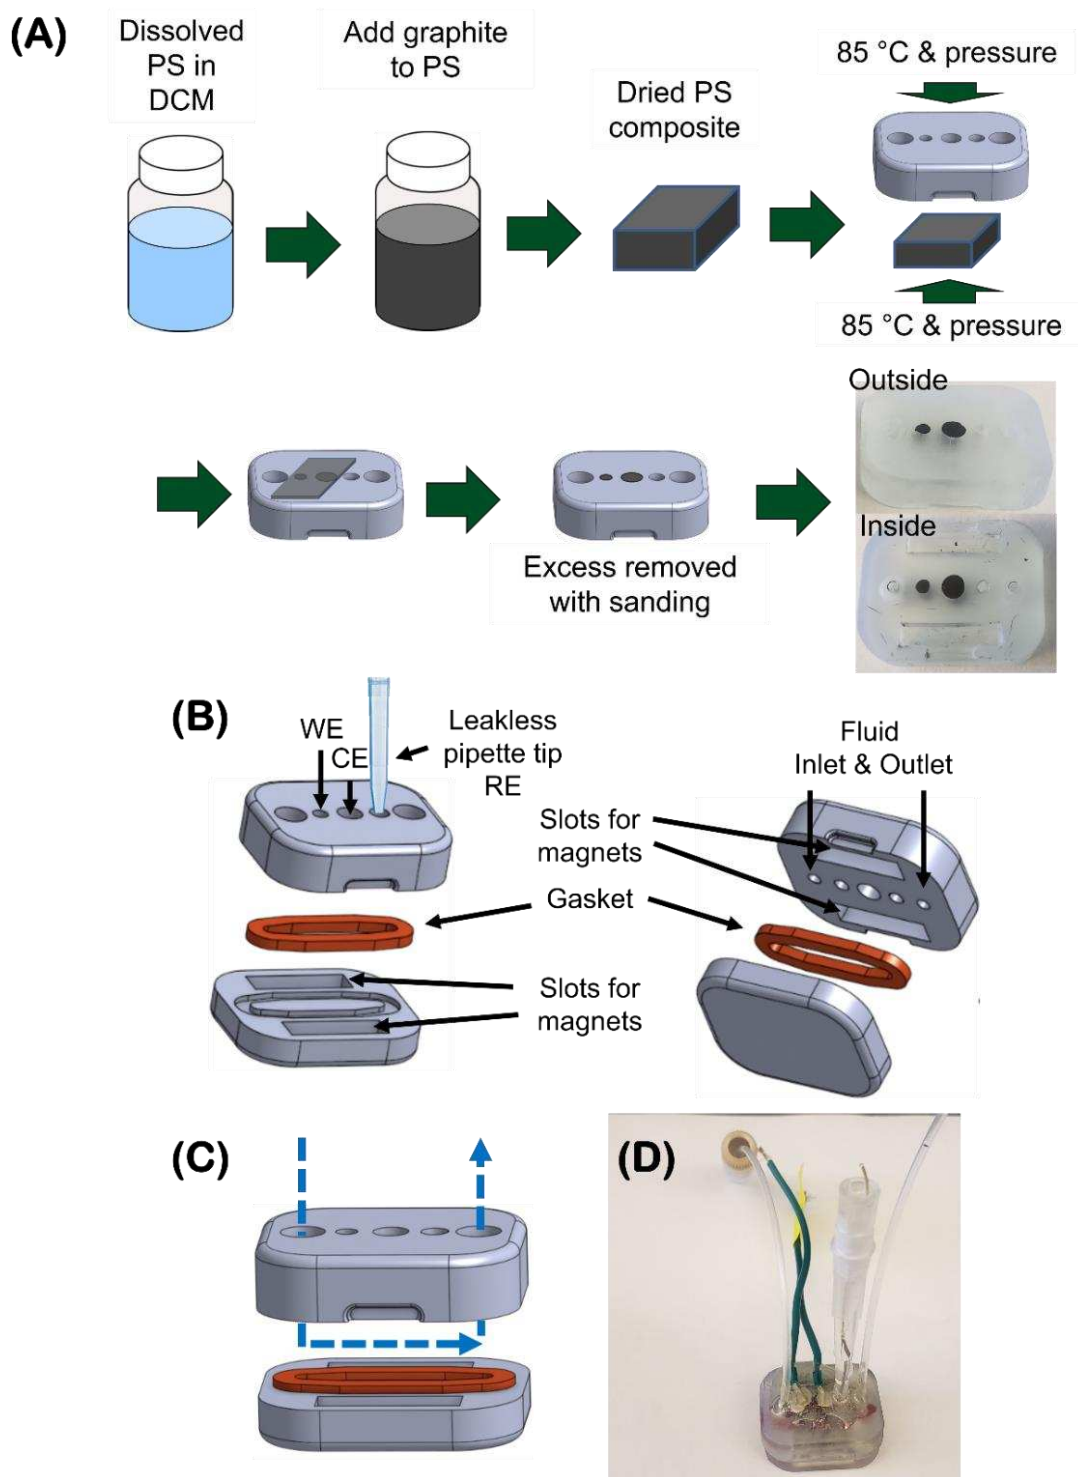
(A) Simple fabrication of PS TPEs, using a 3D- printed template for incorporation into a sensor module. (B) Exploded views of the sensor module showing 3D-printed parts, gasket, and locations for electrode integration. (C) Rendering of sensor module showing flow path. (D) Photograph of fully assembled TPE sensor module. 3D-printed device was designed by Amanda Cherwin. Leakless reference electrode was fabricated by Jason Boes.
